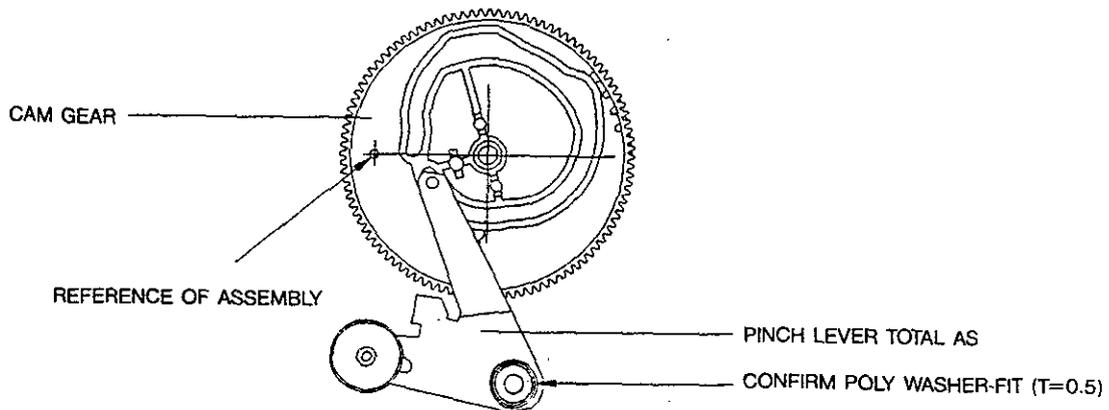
Reference of assembly for the Cam Gear and Pinch Lever
